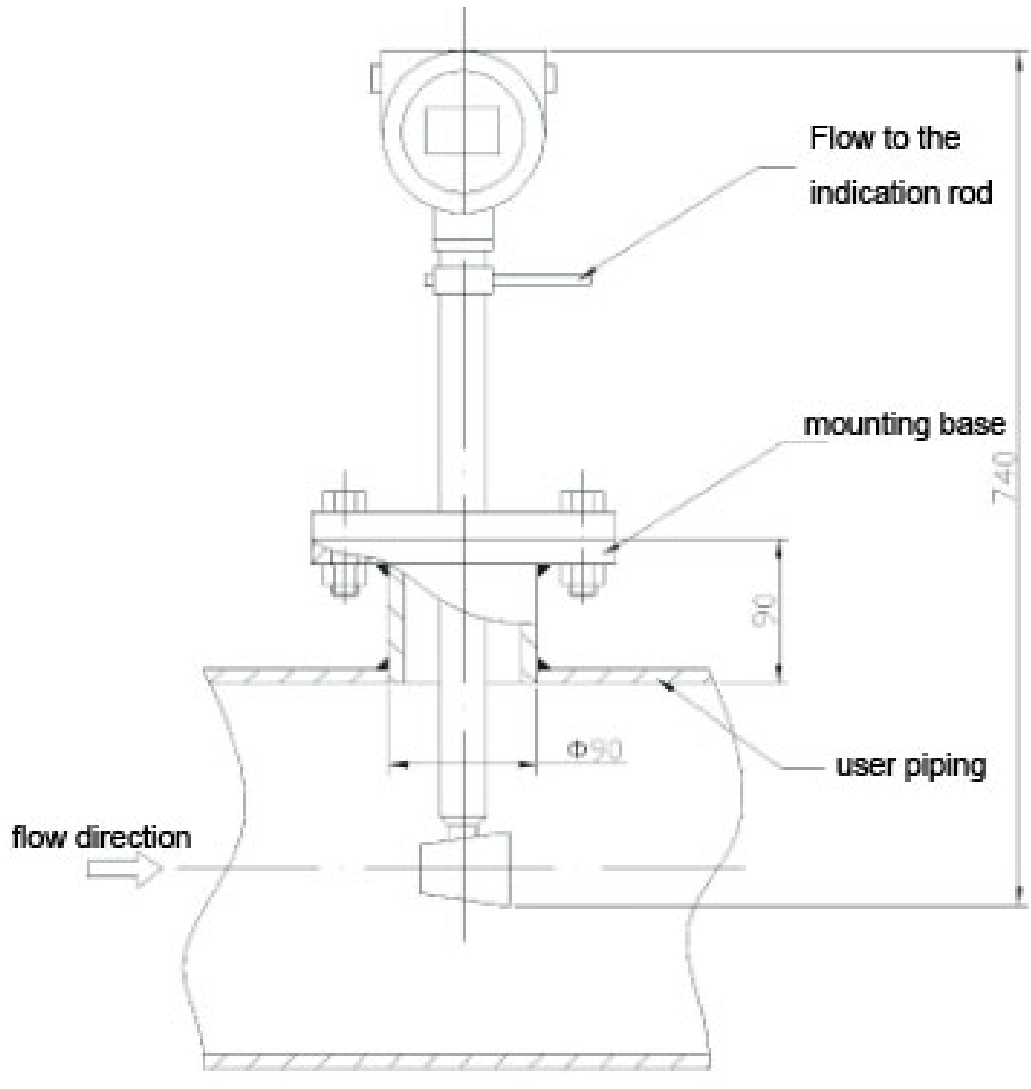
Flange Clamped on Vortex Flowmeter Outline Dimension
